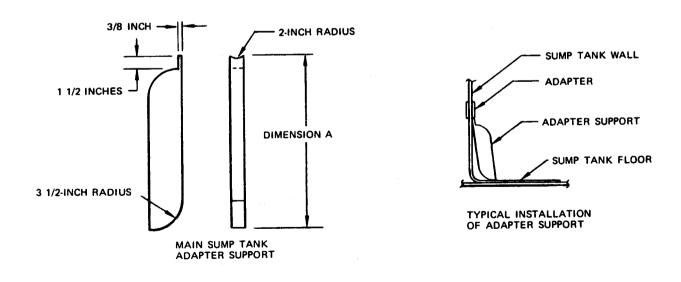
Removal; Main Sump Tank (Sheet 6)
